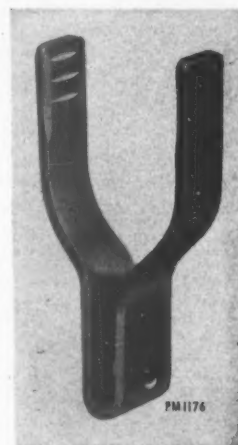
Spring steel yoke and three of the six grooves milled.
